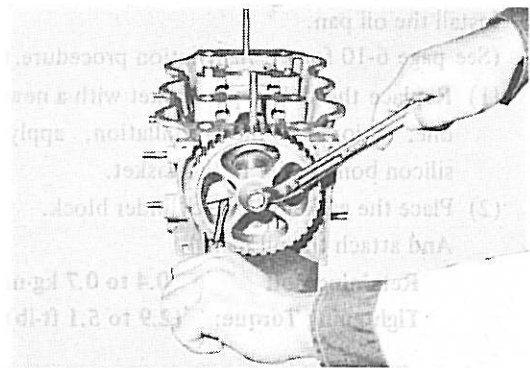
Installing Camshaft Timing Belt Pulley
